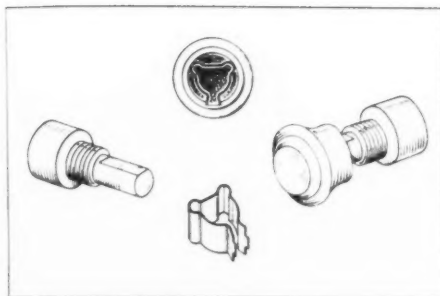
Die-cast Knob with Spring Clip for D-shaped Shaft
